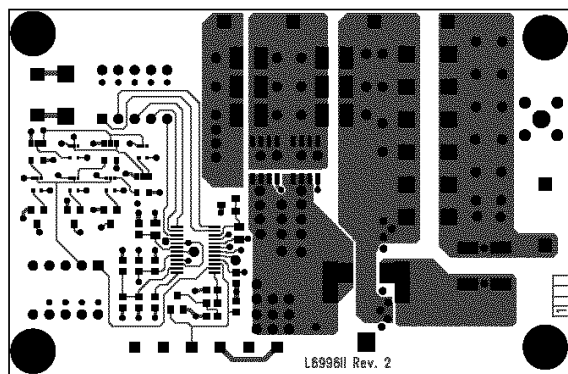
PCB Board Layout - Layer four (Bottom component side)
